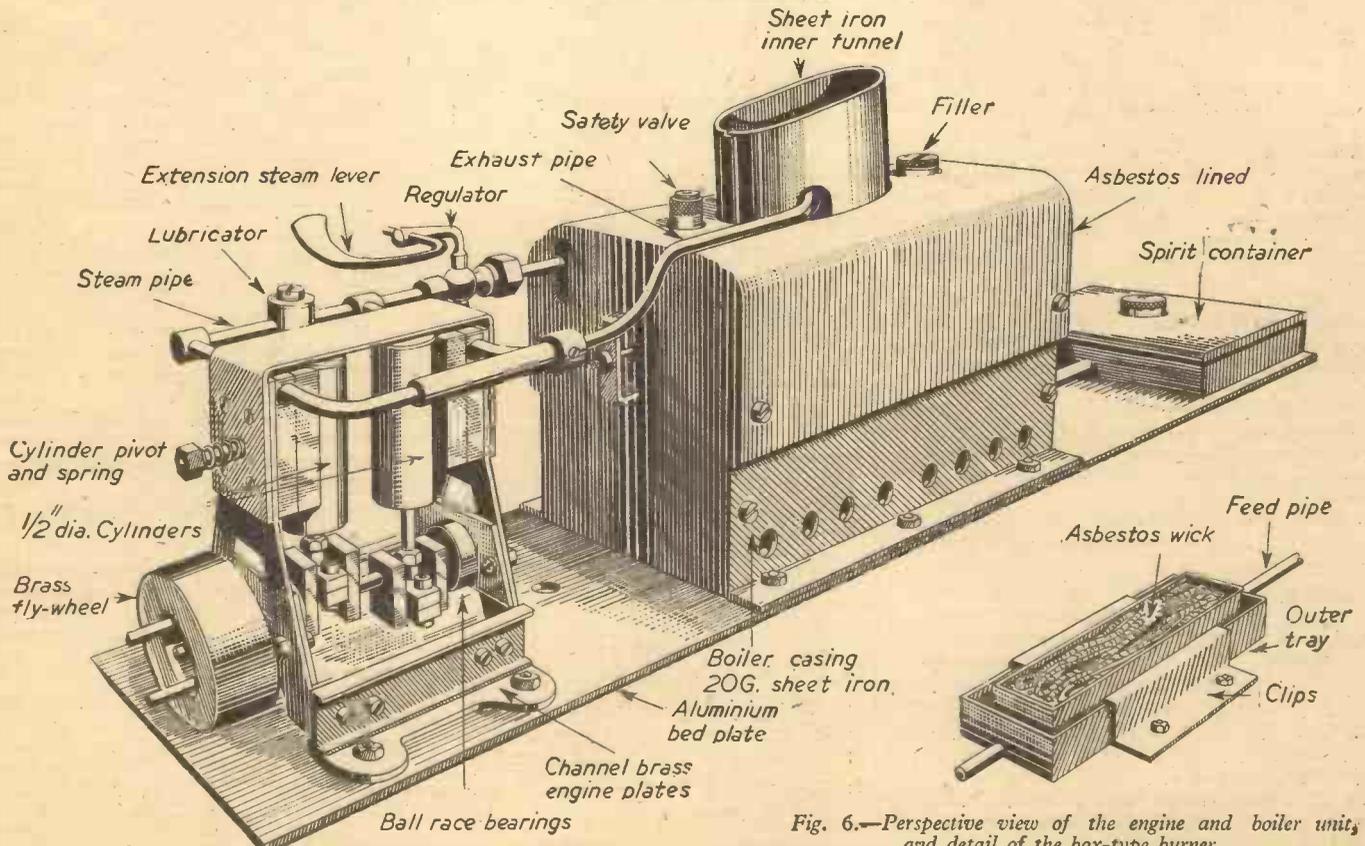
Perspective view of the engine and boiler unit, and detail of the box-type burner.
